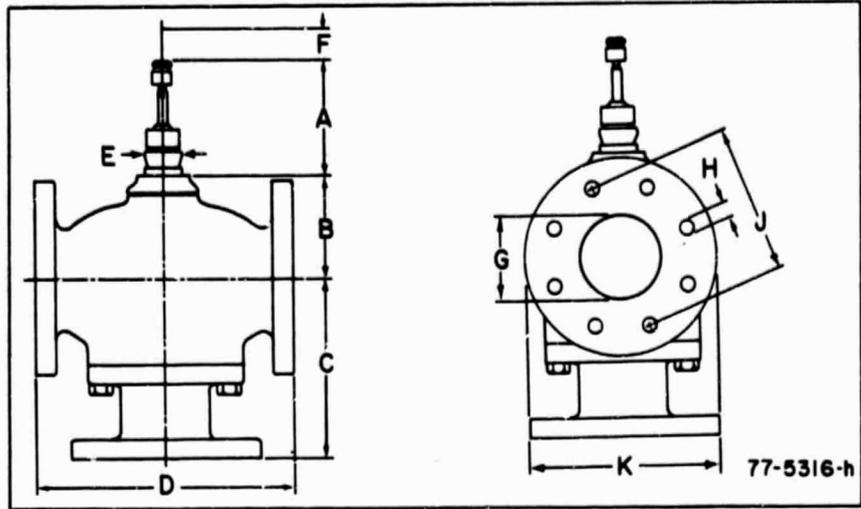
V5013A FLANGED BODY DIMENSIONS (REFER TO TABLE 2 & 3)
